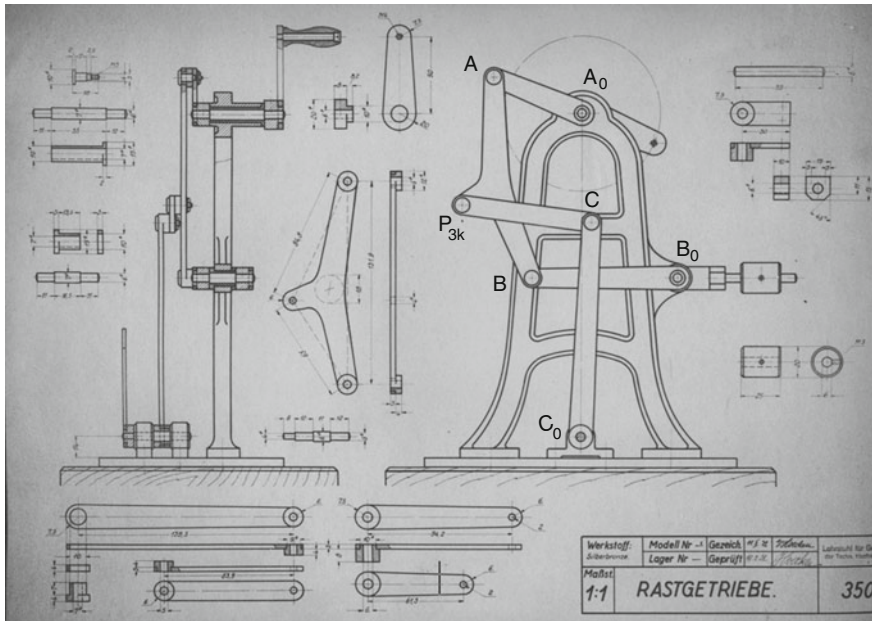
Technical drawing of Hoecken's six-link dwell linkage showing details for its manufacture
